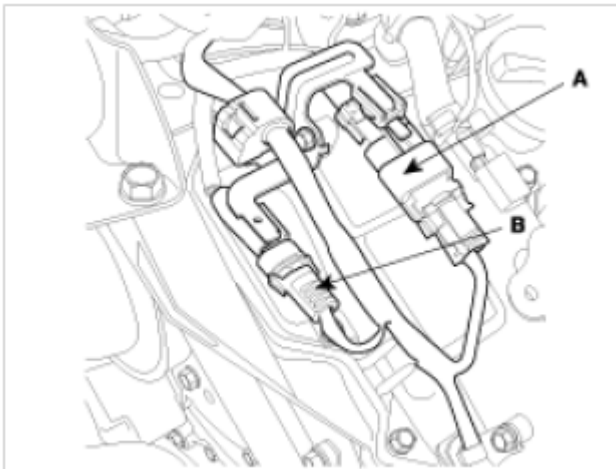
Identifying OCV Connector And Knock Sensor Connector
